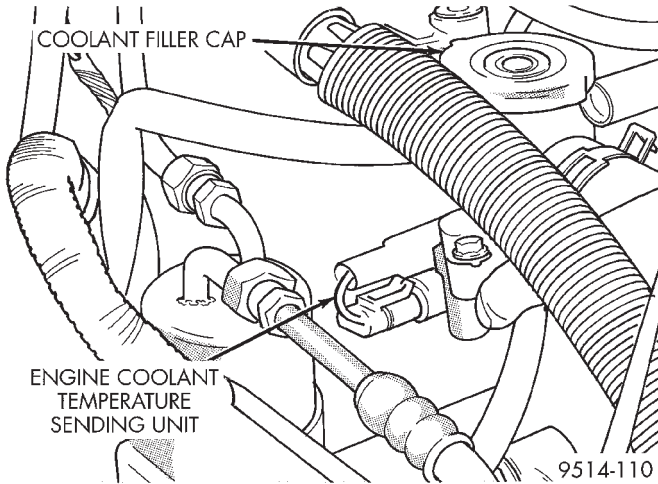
Engine Coolant Temperature Sensor—2.4L Engine
